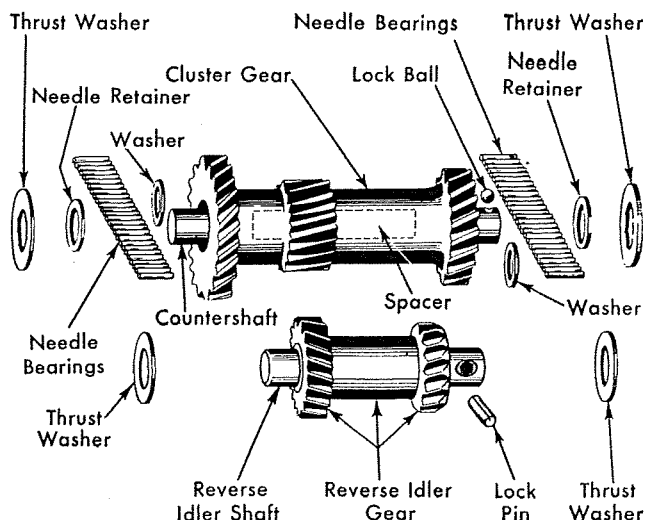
Group No. 19 Pontiac-Buick-Olds Countershaft and Reverse Gears
